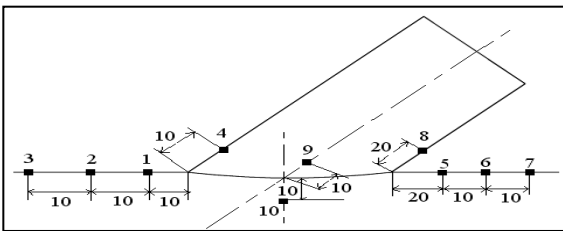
Distance (in mm) from Weld Intersection
